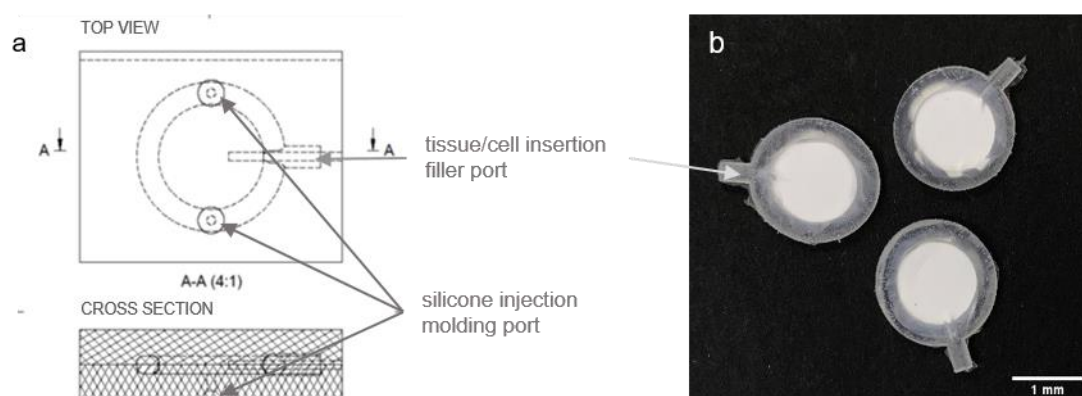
Simple macroencapsulation device. Created by curing medical grade silicones in 3D printed injection moulds. a Technical drawing of injection mould for encapsulation device. b Fabricated simple macroencapsulation devices with filler port..
